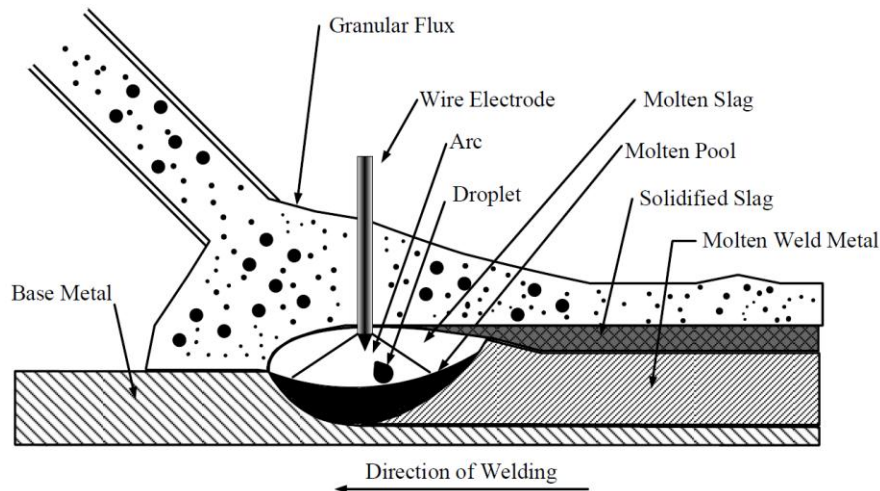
Submerged Arc Welding (SAW) [Lee 2006]
